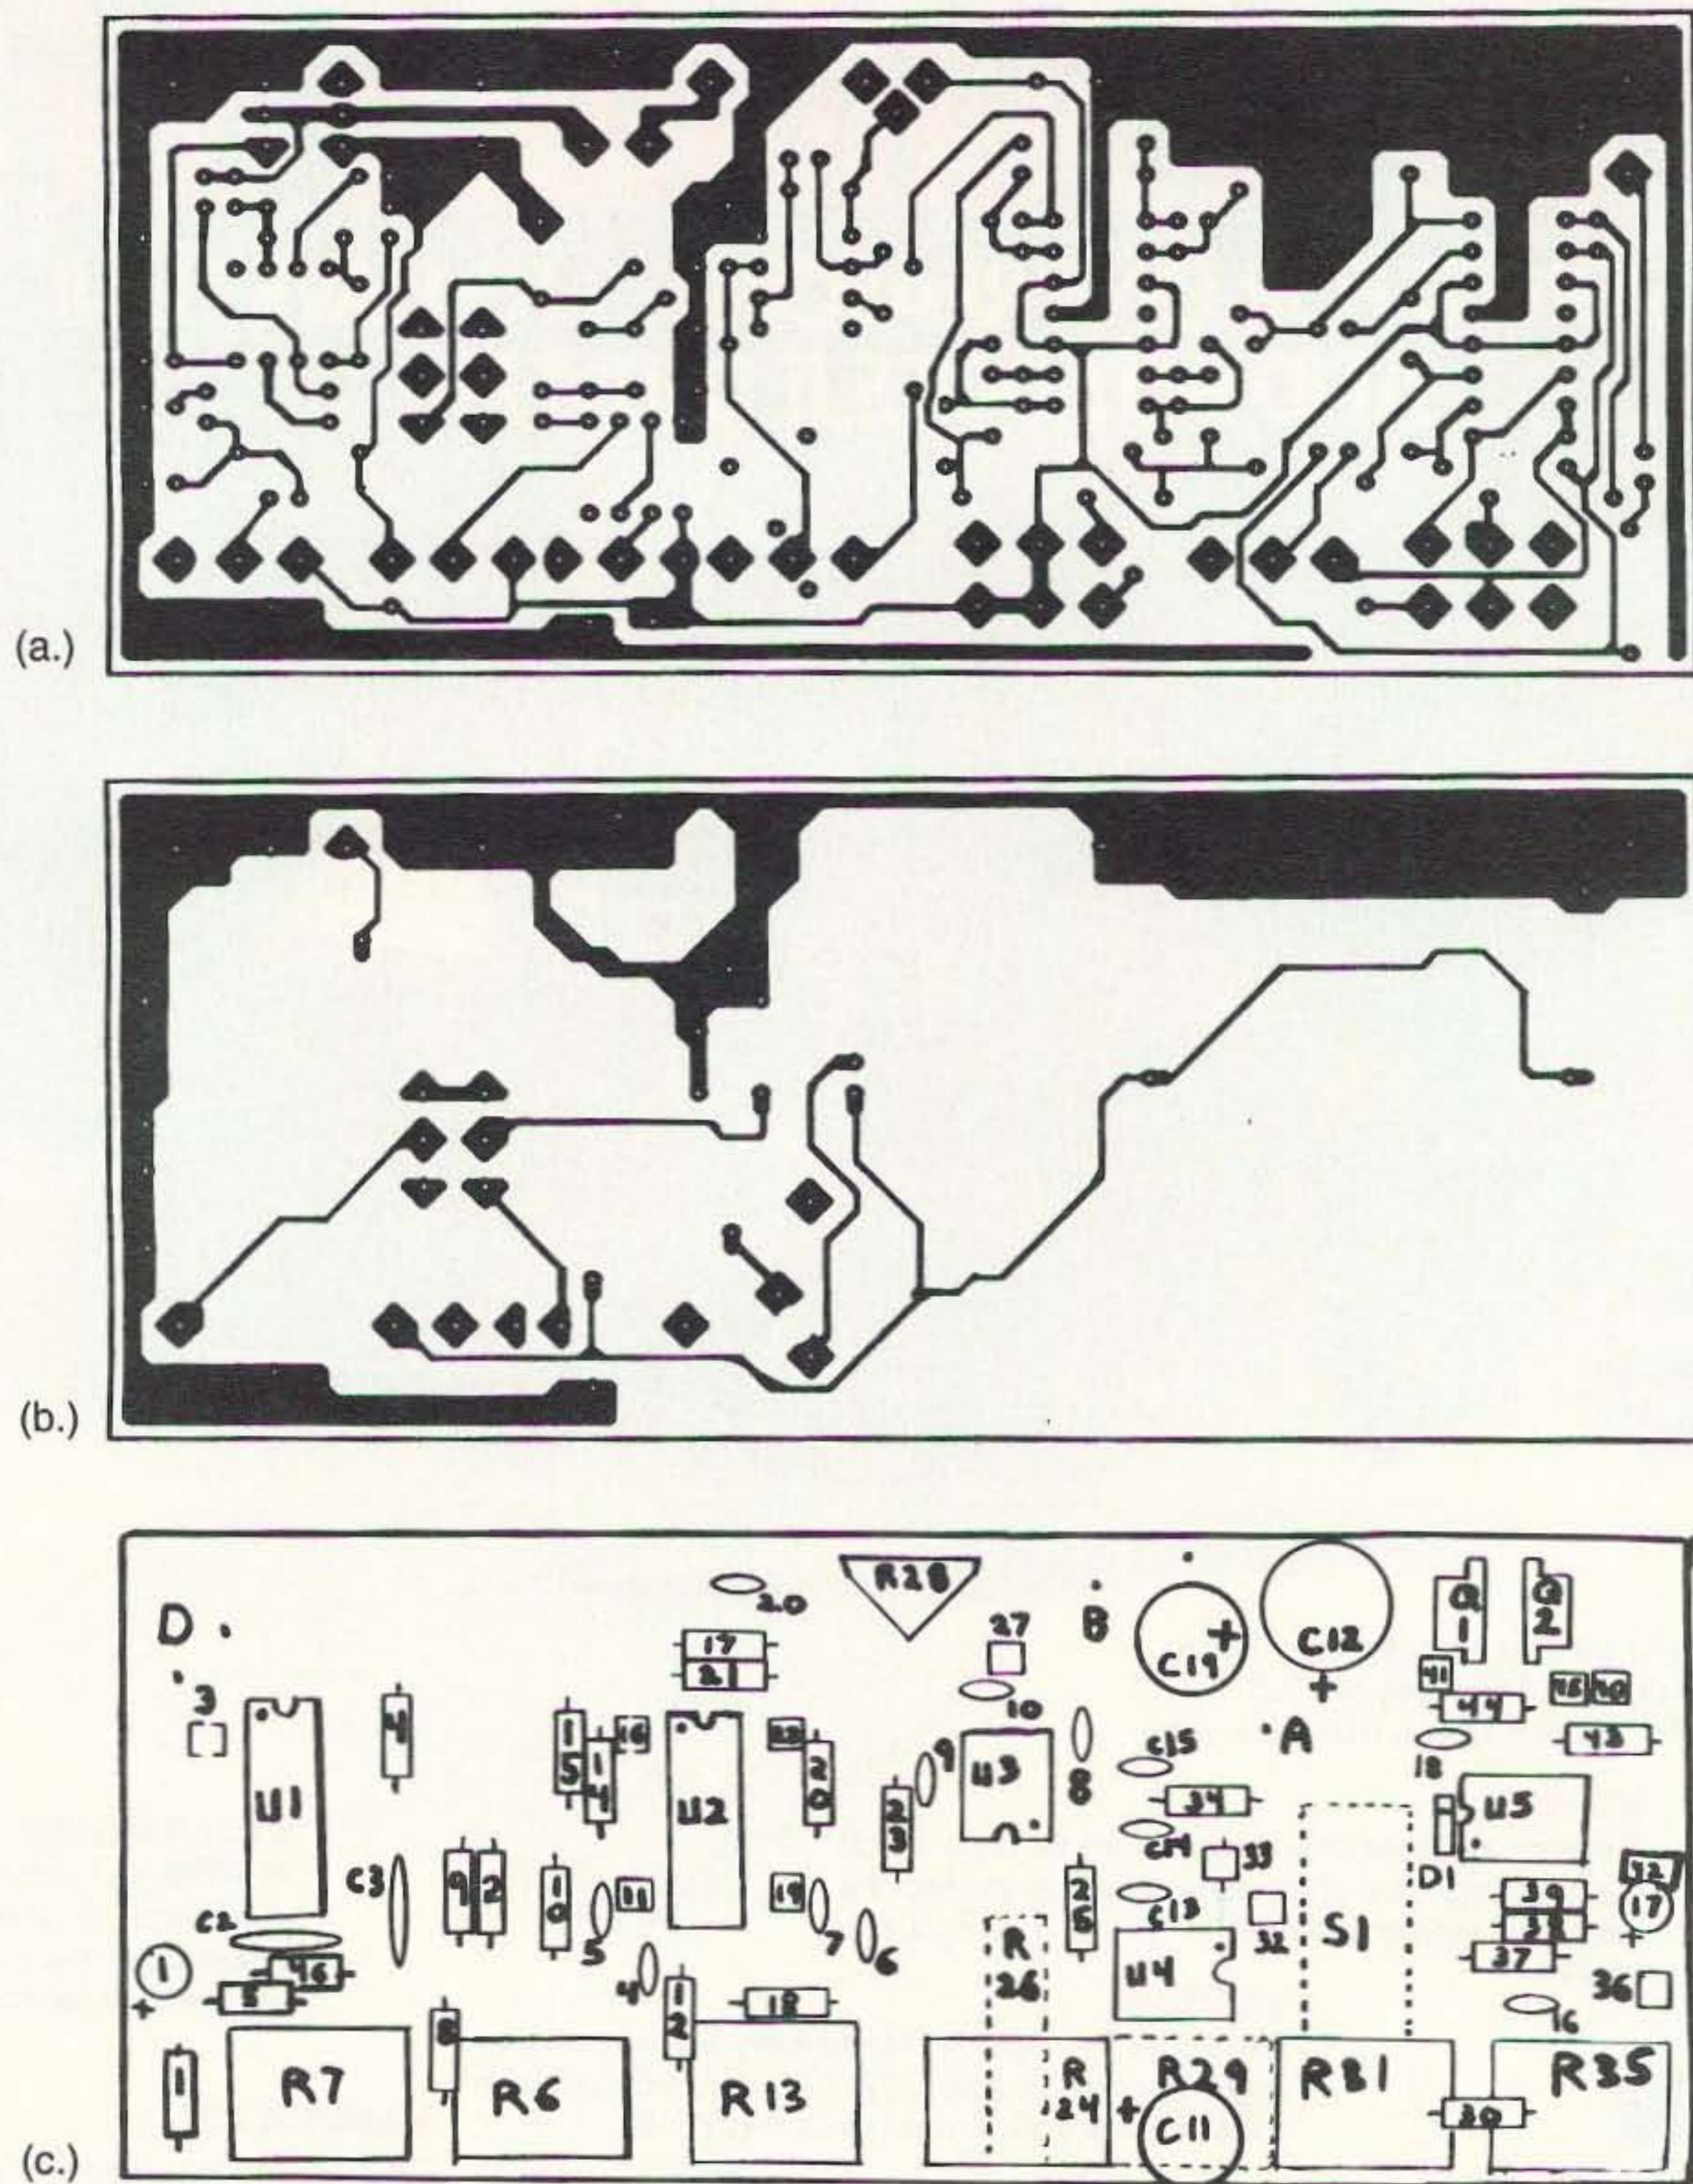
Double-sided PC board layout: a. Solder side; b. Component side; c. Parts placement diagram.
